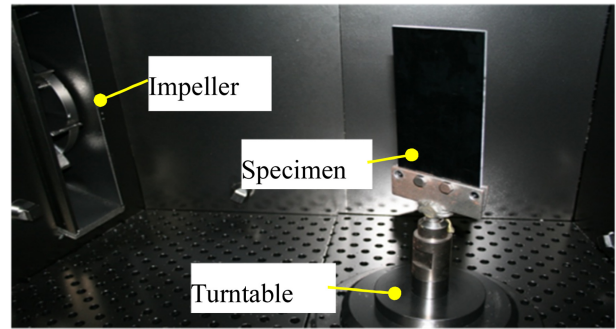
Inner chamber of shot-peening machine (PMI-0608)
